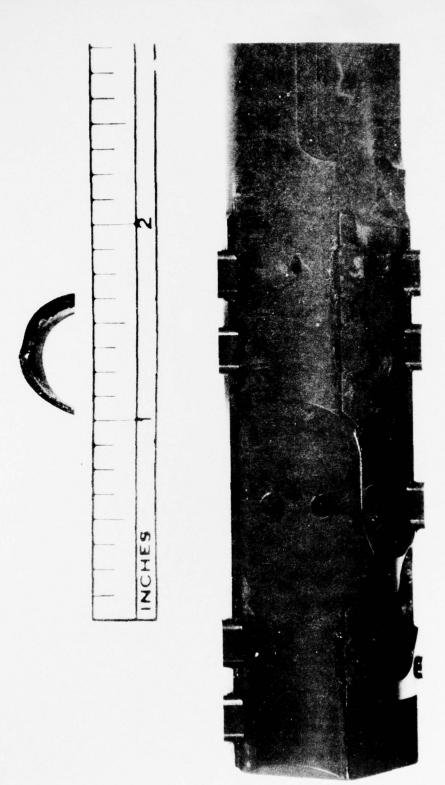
Right Side of Bolt Carrier Showing Inserts in Place.
